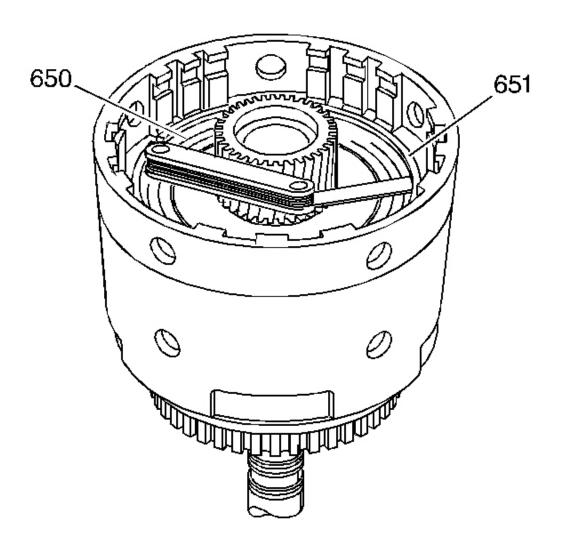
Measuring Forward Clutch Plate Travel Courtesy of GENERAL MOTORS CORP.
